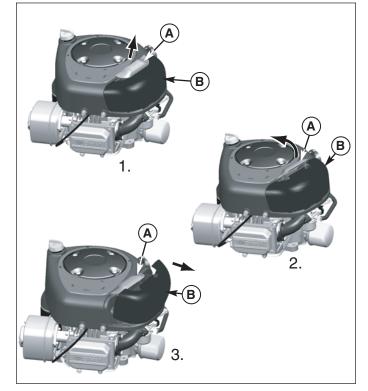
Air Filter Assembly - Briggs & Stratton Single Cylinder Models
